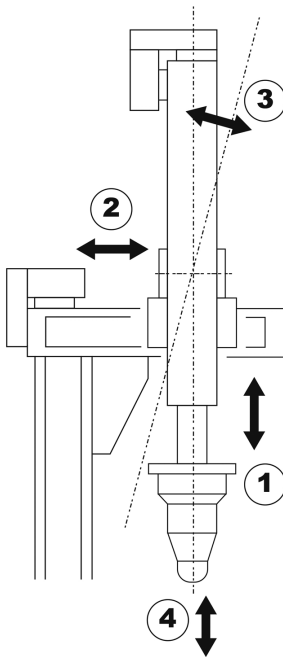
Ceramic TF ladler for vertical indirect squeeze casting machines [Kau95a].
